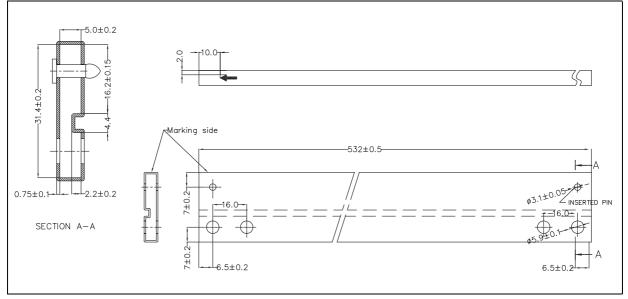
Drawing dimension tube for TO-220 Dual Gauge (mm.)
